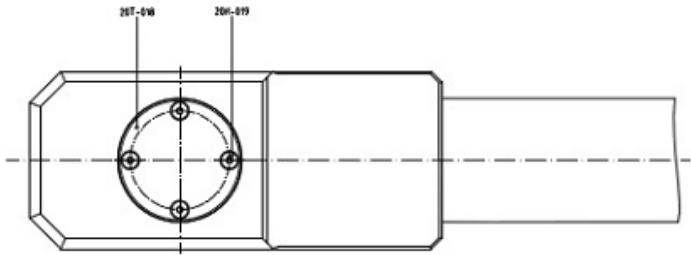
GATE VALVE GRINDING AND LAPPING MACHINE
